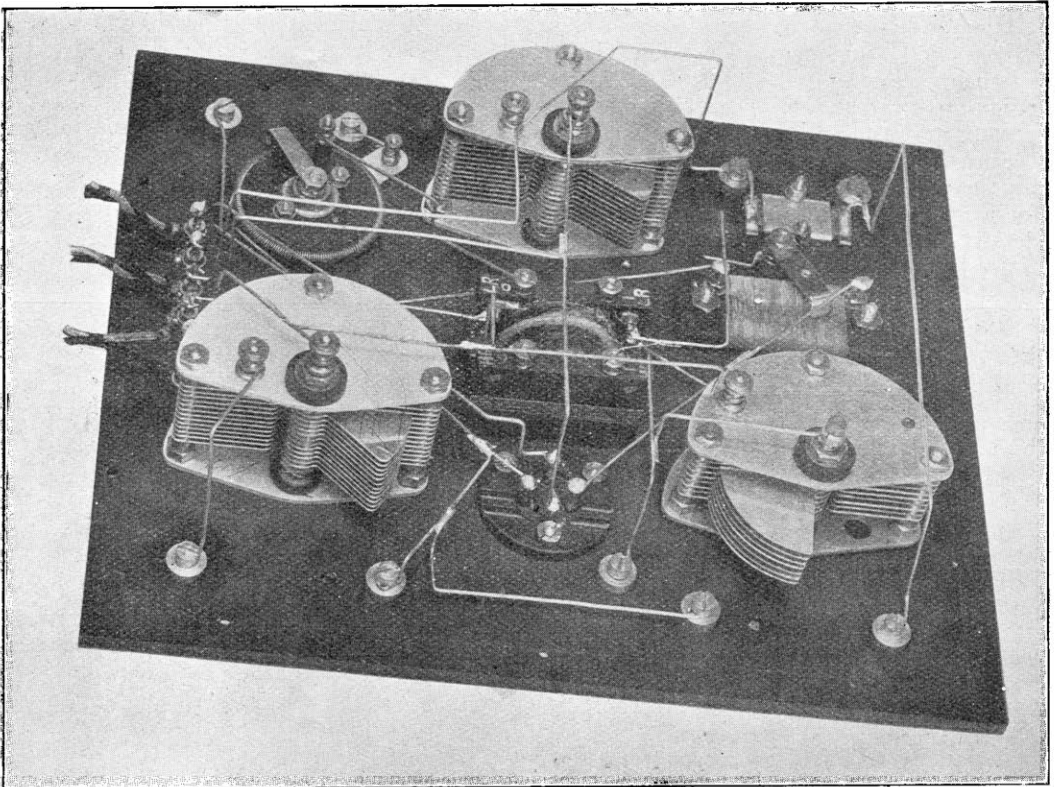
The wiring of the receiver is clearly shown in this photograph.
